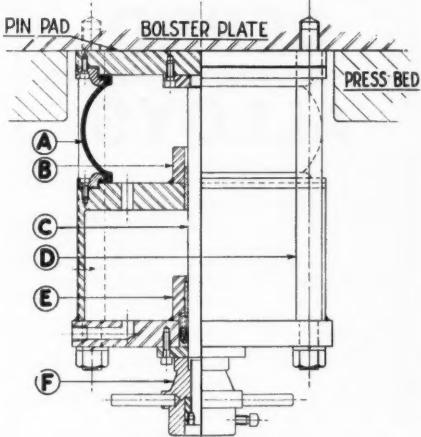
Drawing showing method of mounting Dayton Rogers Model "L" Pneumatic Die Cushion
